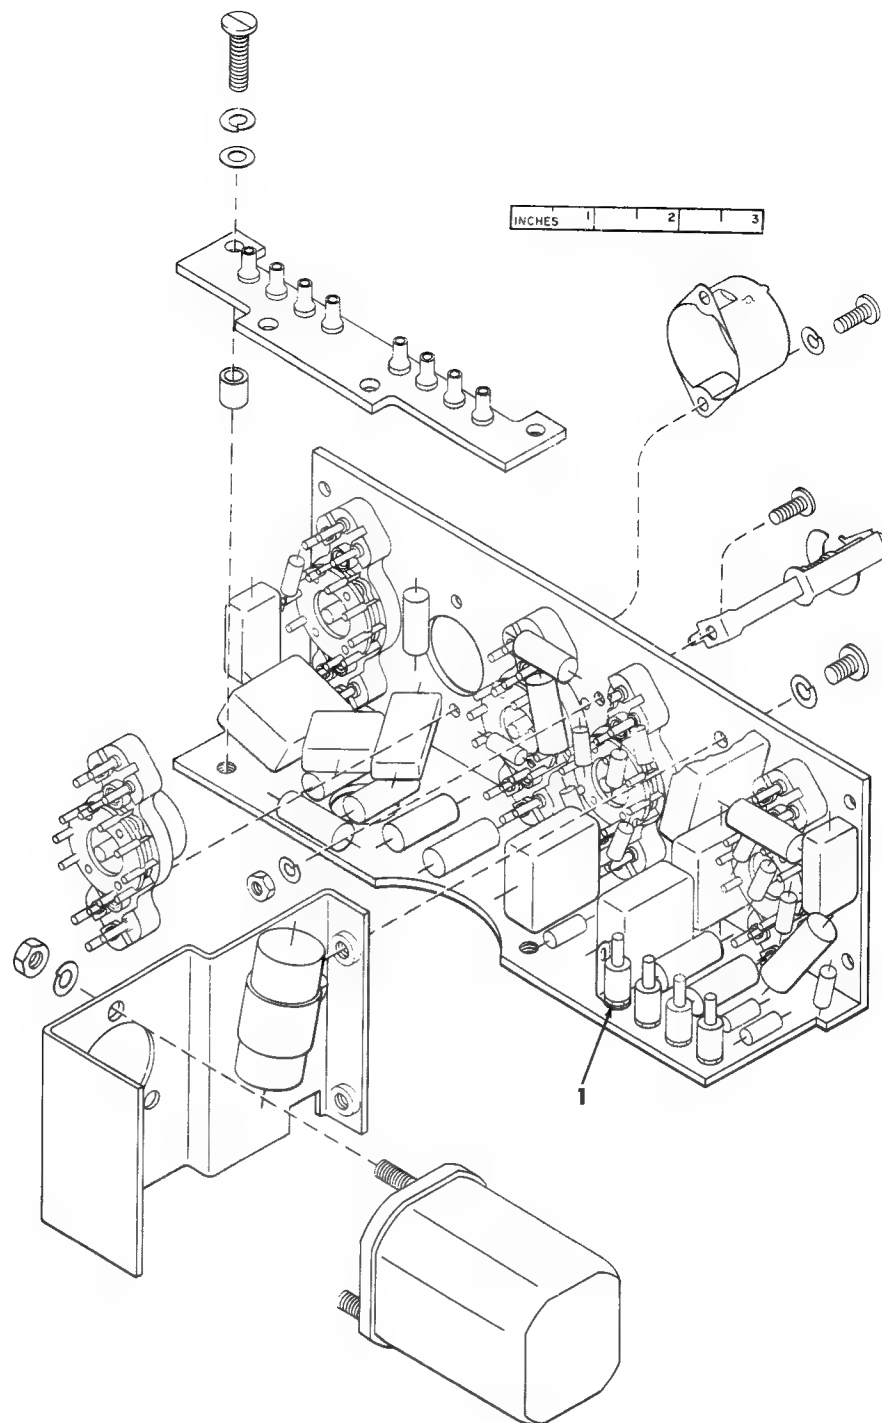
Oscillator subassembly (9141254)—partial exploded view
